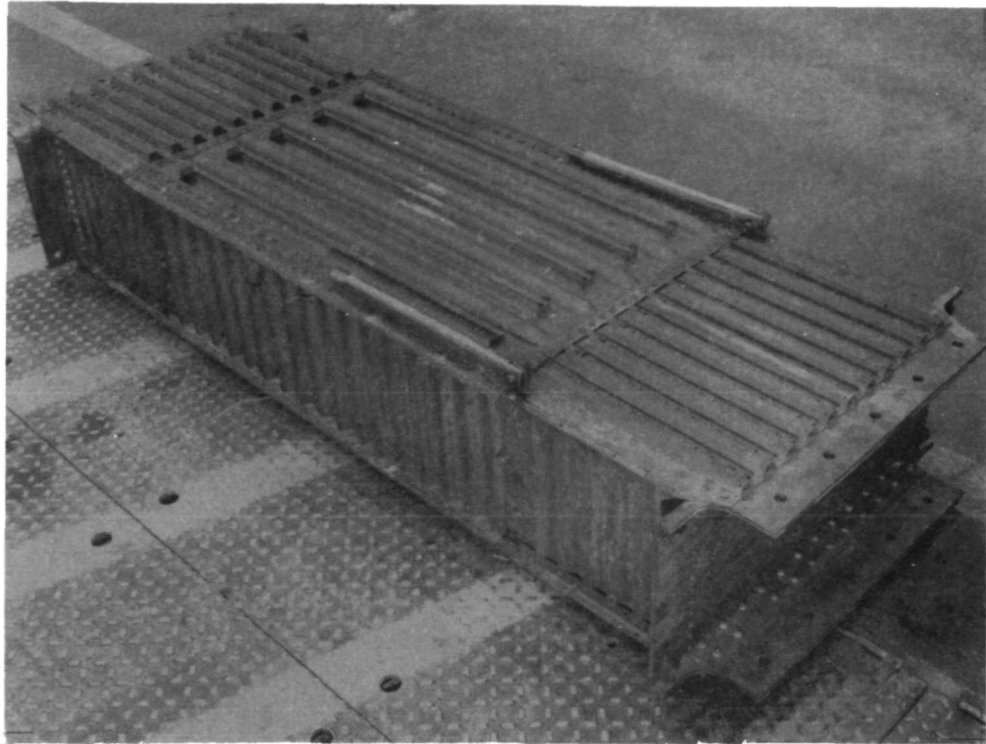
Hypersonic Wing Box Test Specimen with Test Panel Fastened in Place
